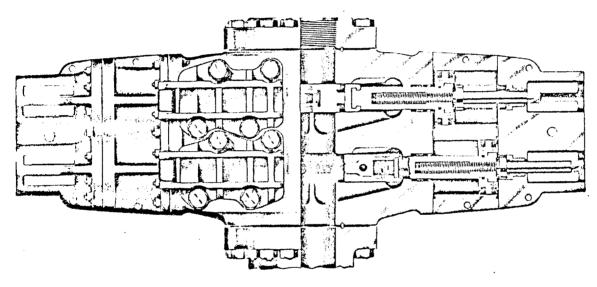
Shaffer Type E Hydraulic Double Blowout Preventer—Front View
